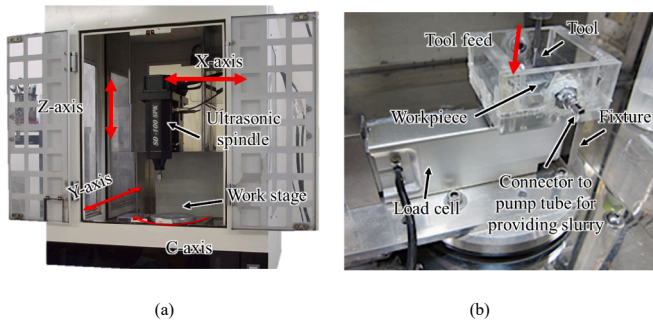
Experimental setup: (a) the main machine body, (b) installation of the load cell.
